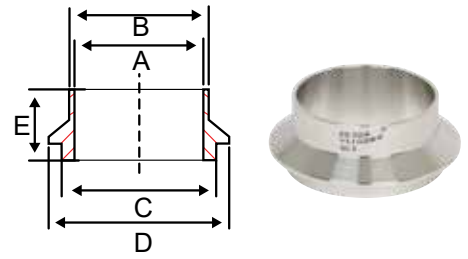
WI4 - Female I-line Short Weld Ferrule
